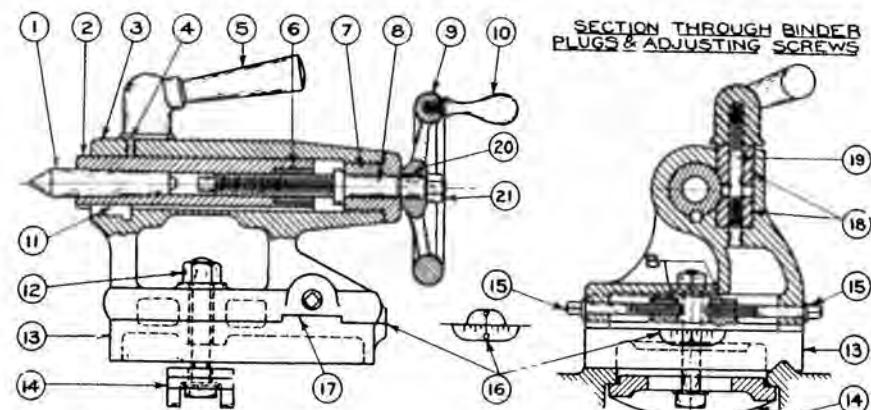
Details of engine lathe tailstock: 1. Tailstock center; 2. Spindle; 3. Body of tailstock (top); 4. Oil hole; 5. Binder handle; 6. Spindle nut; 7. Screw bushing; 8. Screw; 9. Handwheel; 10. Machine handle; 11. Key for spindle; 12. Clamp bolt; 13. Base; 14. Clamp; 15. Adjusting screws; 16. Alignment scale; 17. Guide; 18. Binder plugs; 19. Binder stud; 20. Woodruff key; and 21. Handwheel nut.
